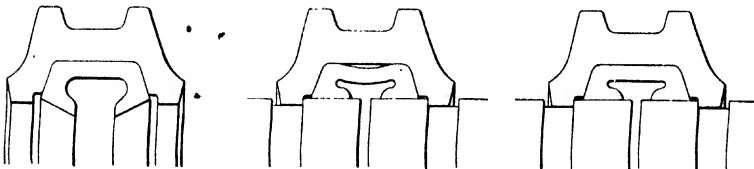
SECTIONS THROUGH HOUSING AND RINGS
